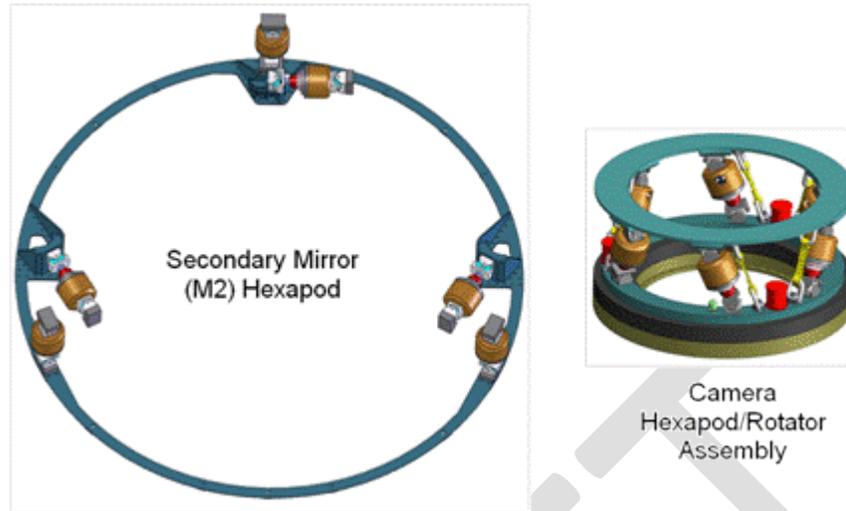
LSST M2 Hexapod and Camera Hexapod/Rotator Assembly
